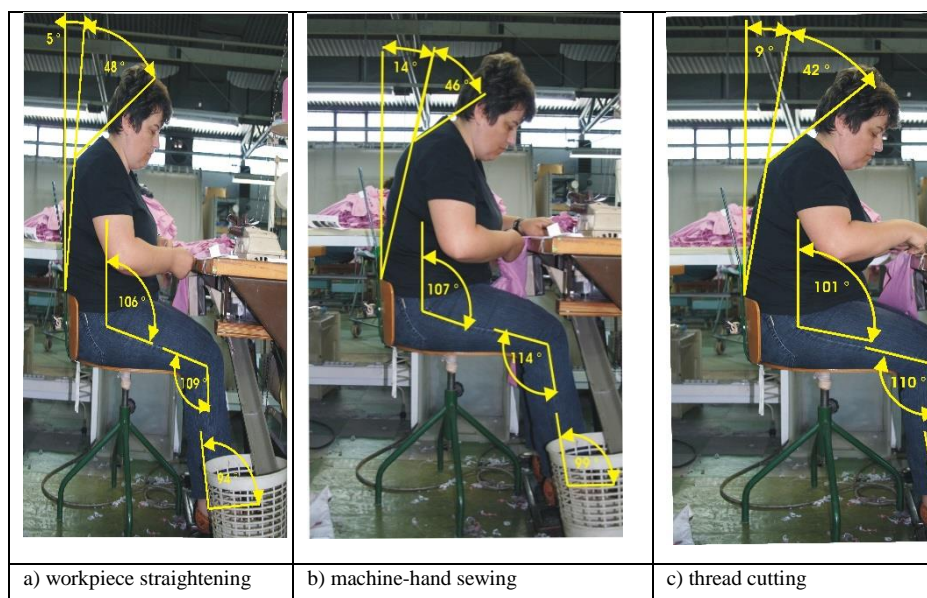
Ultimate working posture at workplace with a display of the kinematic chains: a) workpiece straightening, b) machine-hand sewing, c) thread cutting
